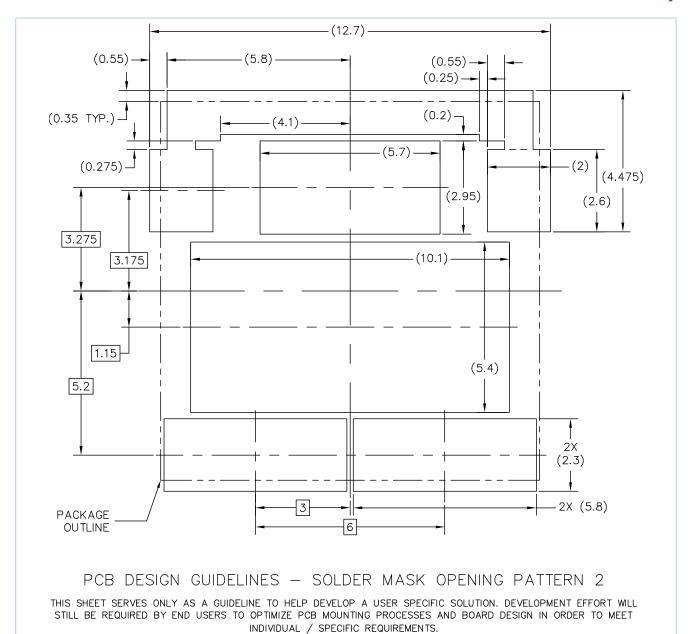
Package outline dt4 HQFN23 (SOT1631-4)
